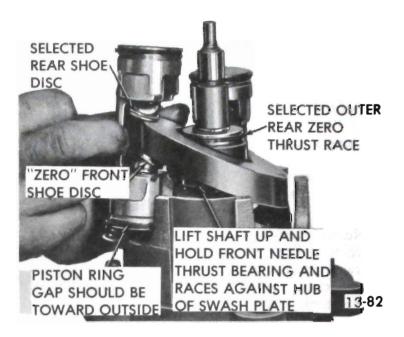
Installing Piston Assembly in Front Cylinder Half
